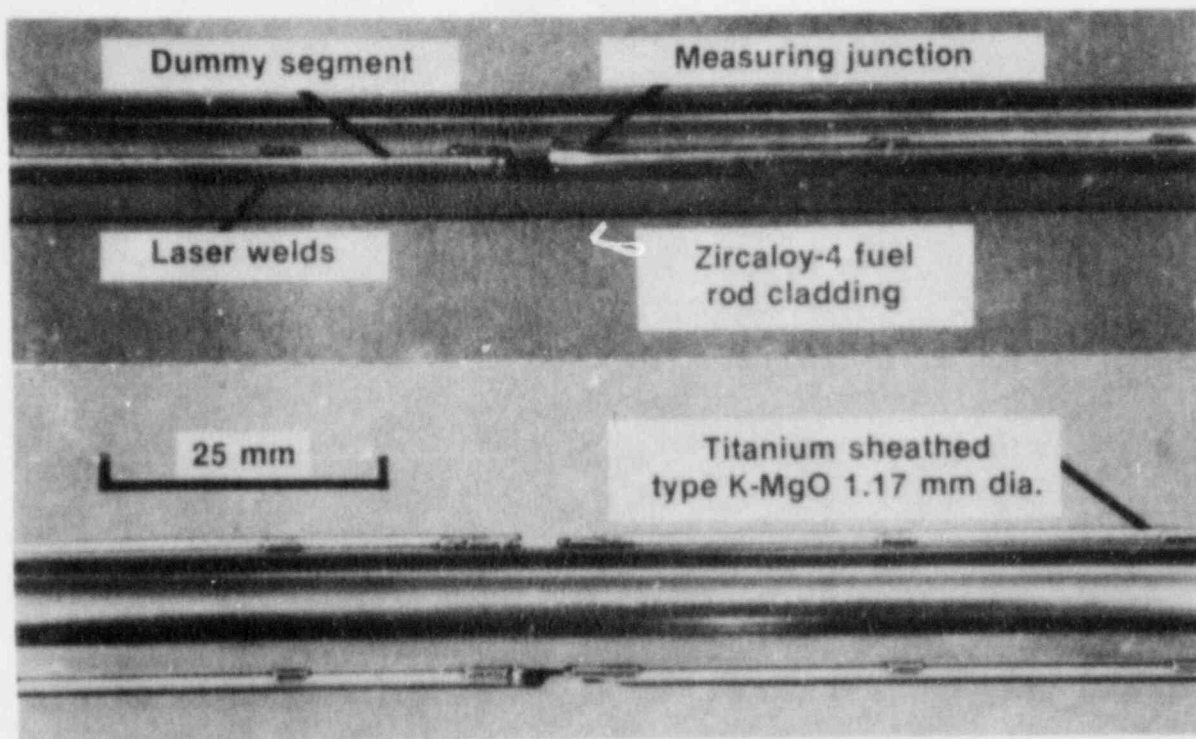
LOFT fuel rod cladding external thermocouple attachment.
